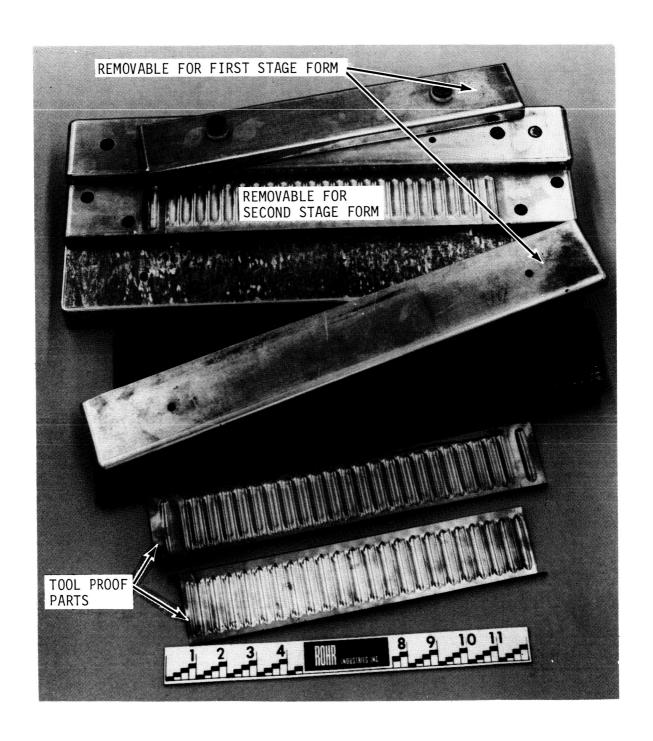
6061 Aluminum Form Block With Removable Details and Tool Proof Parts
